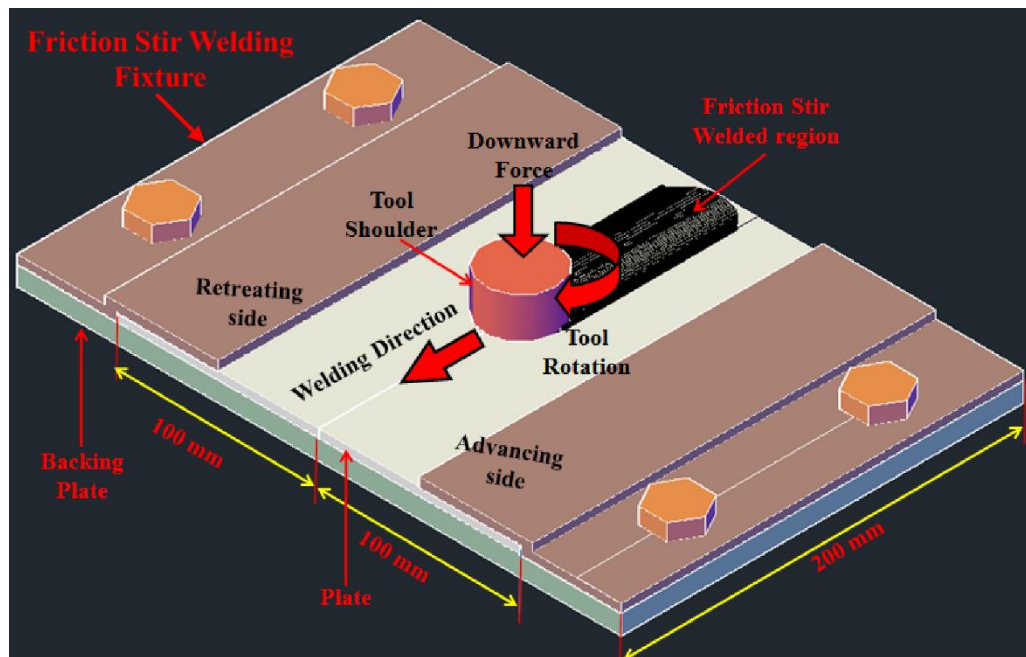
Schematic diagram of the friction stir welding process
